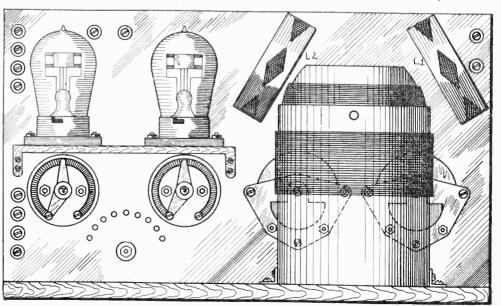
Rear view of the panel, showing the method of mounting the vacuum tubes, variocoupler, and inductance or honeycomb coils. Suggested by Frederick J. Rumford. Drawn by S. Newman
